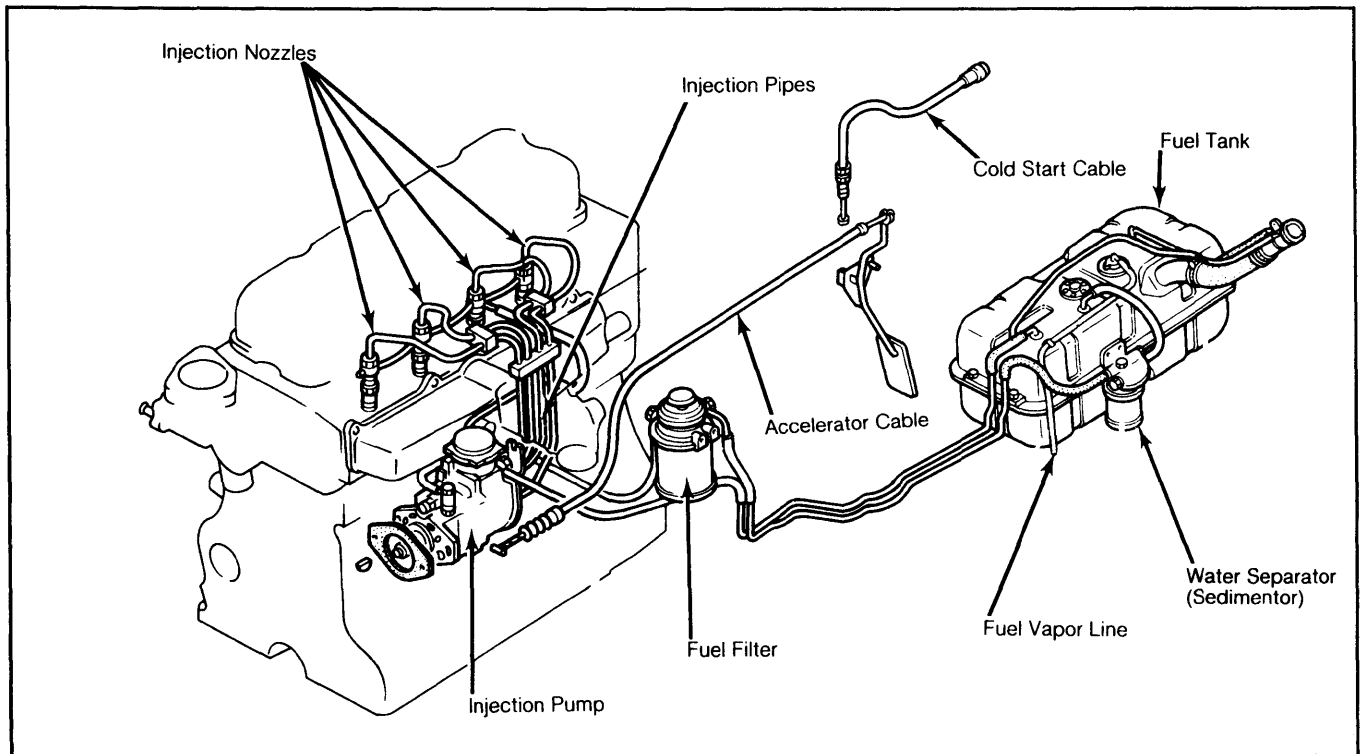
Diesel Kiki Diesel Fuel Injection Pump
